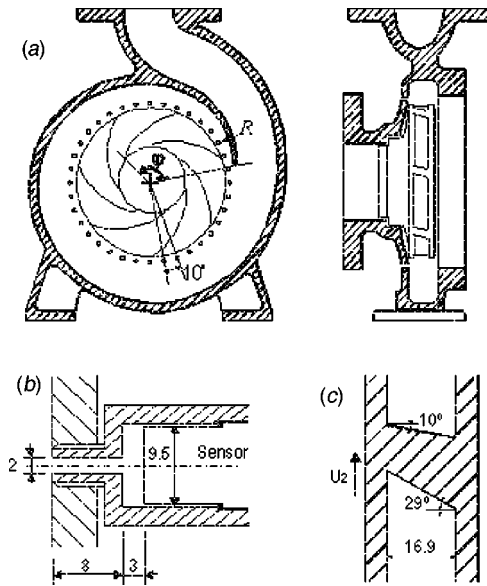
(a) Sketch of the test pump showing location of the pressure taps; (b) detail of pressure transducer mounting; (c) detail of impeller outlet (all dimensions in mm)
